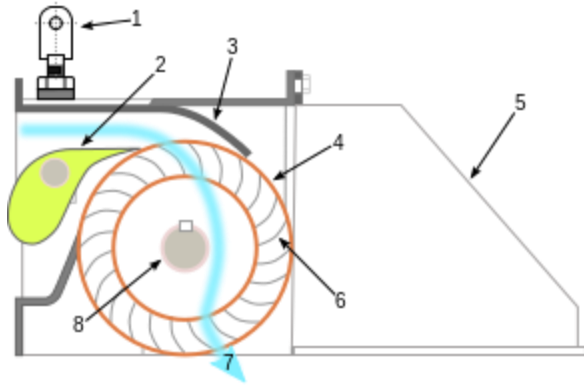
Cross sectional view of a cross flow turbine showing the runner, guide vane / valve and housing.
